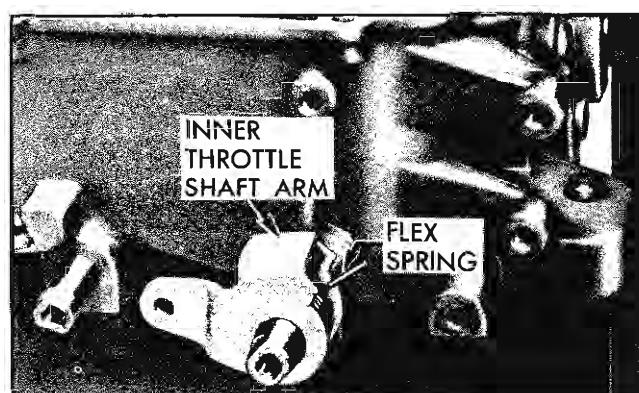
B-113 Inner Throttle Shaft Arm and Flex Spring Installed
